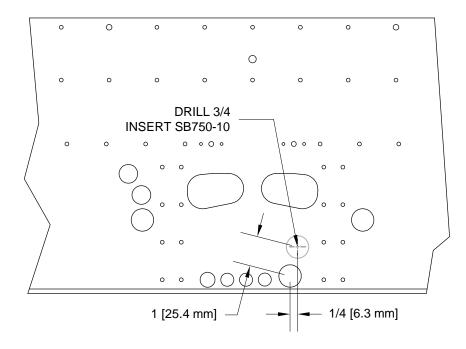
MODIFYING F-1204A (FRONT CUTAWAY VIEW)
